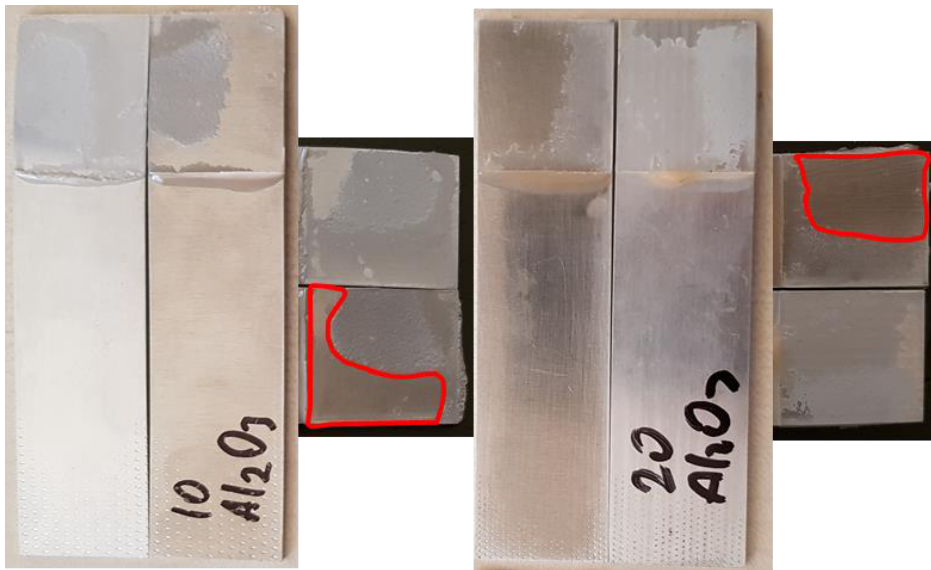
Fracture Surfaces of Al₂O₃ Samples
